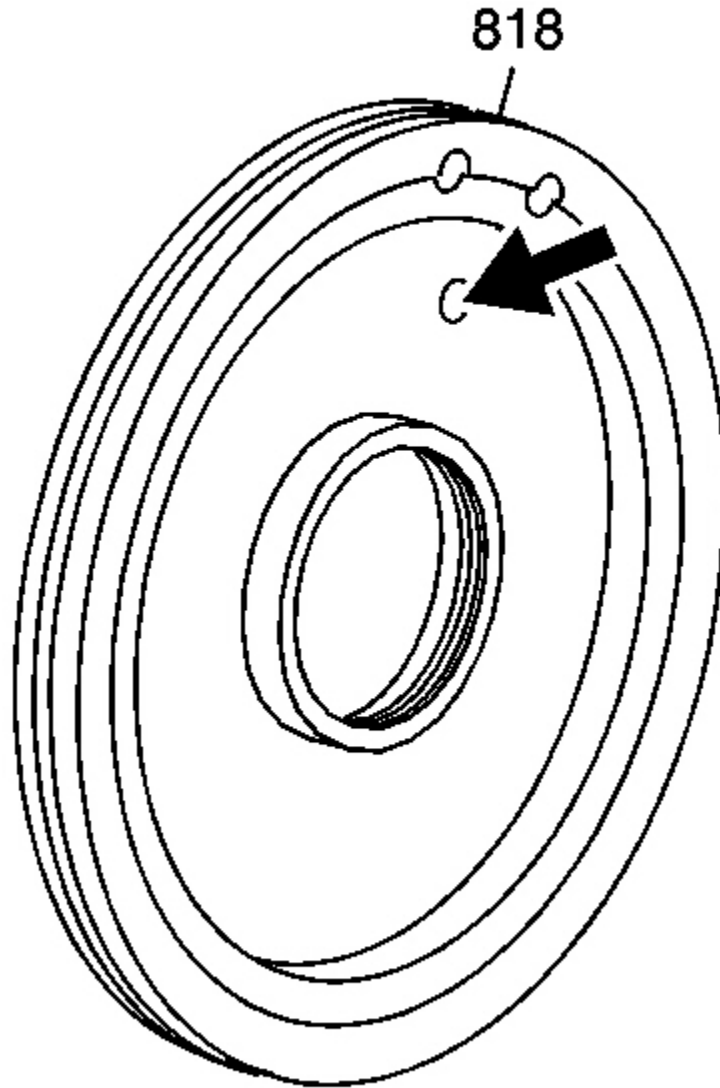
Inspecting The 3rd Clutch Piston & Clutch Piston Check Valve
